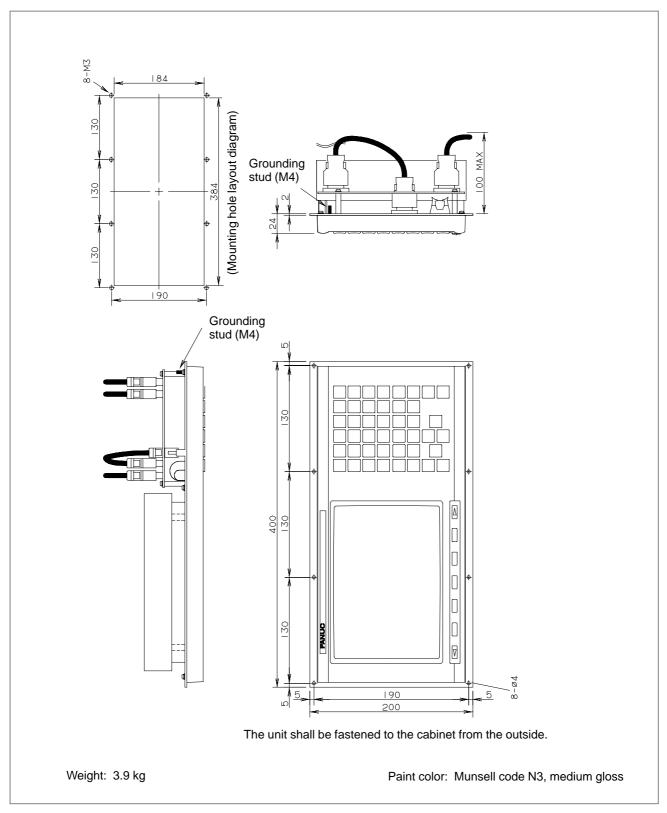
7.2" LCD/MDI Unit Outline Drawing
